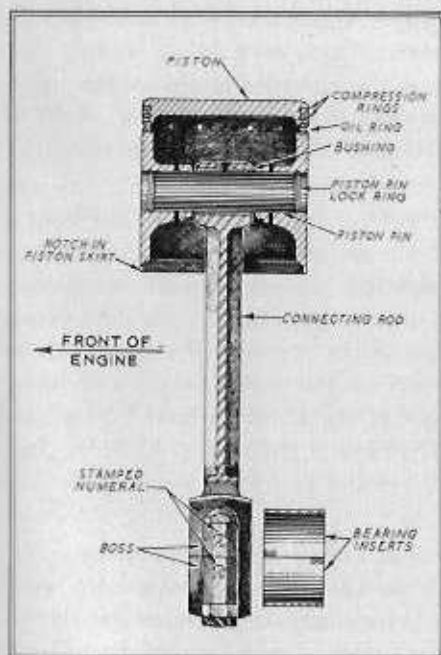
SECTIONAL VIEW OF PISTON AND CONNECTING ROD ASSEMBLY
